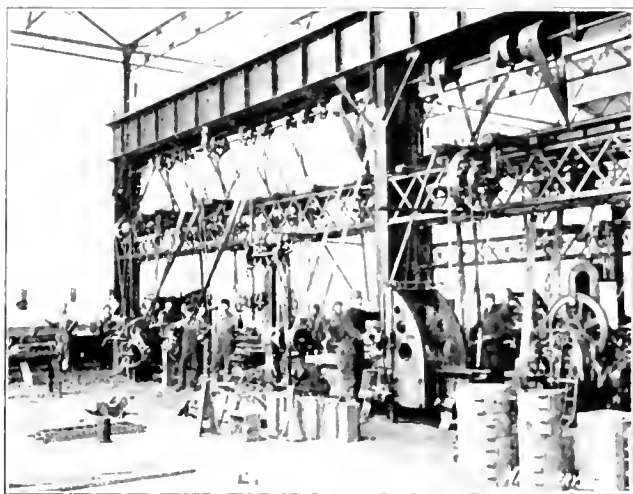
Bay where Small Tools are Located. Lattice Girders used to support Countershafts
